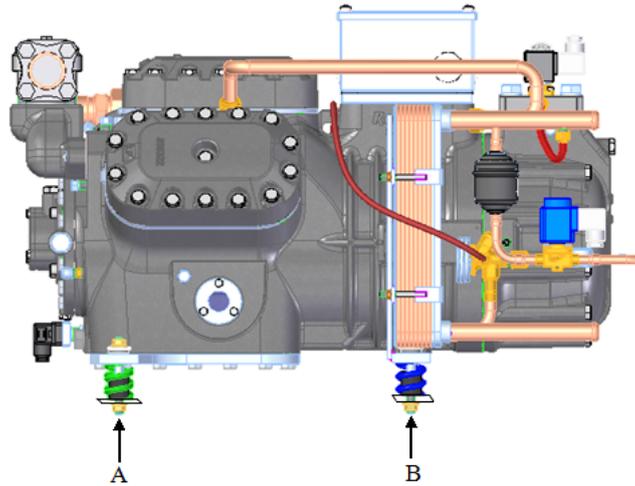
Assembly position of spring shock pad of the SBC series compressor
